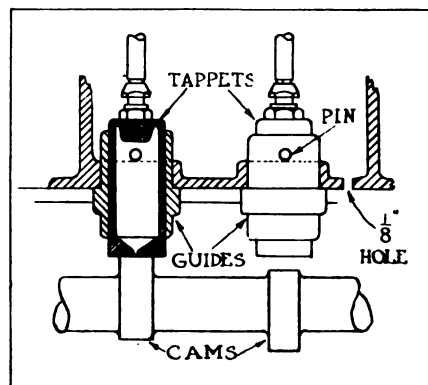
The push rod is held away from the cam by inserting a cotter pin in the hole shown. The 1/8-in. hole at the right is for oil drainage
